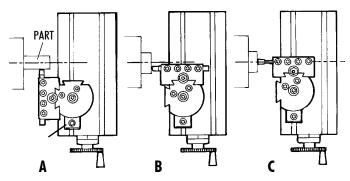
The 1/4" cutting tool can be mounted in either position. Figure A shows the positon for cutting and Figure B shows the position for facing. Figure C shows the boring tool positioned to bore the end of a piece of stock.
